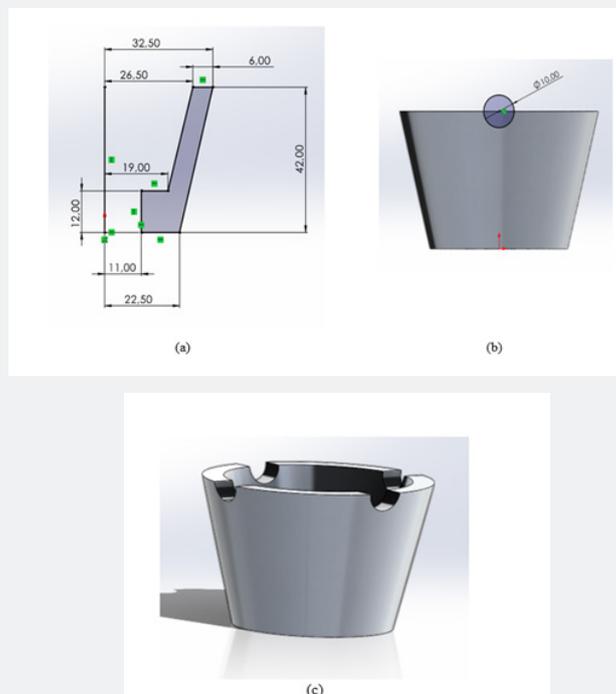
Cup (Part-4) Design (a) Dimensional 2D view, revolve (b) Extruded Cut ($\varnothing 10$) (c) 3D CAD model.
